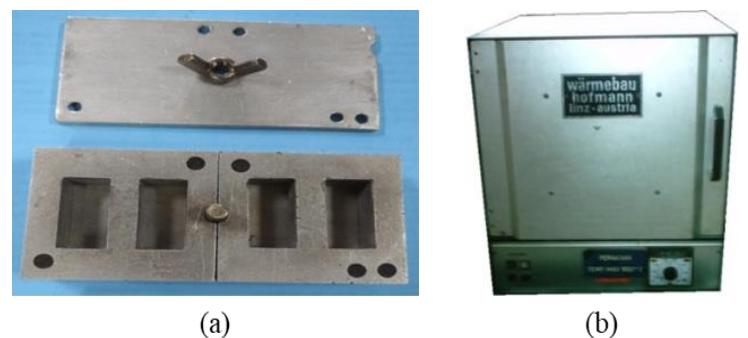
Specimen preparation equipment. a) Aluminum mold, b) Electrical furnace
